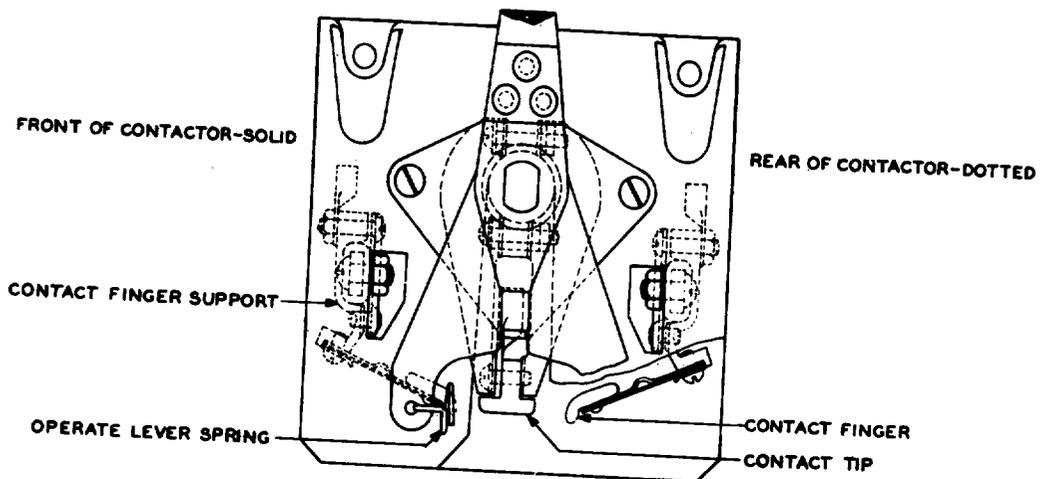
Rotary-type Contactor Mechanism on Form K1 Starter
